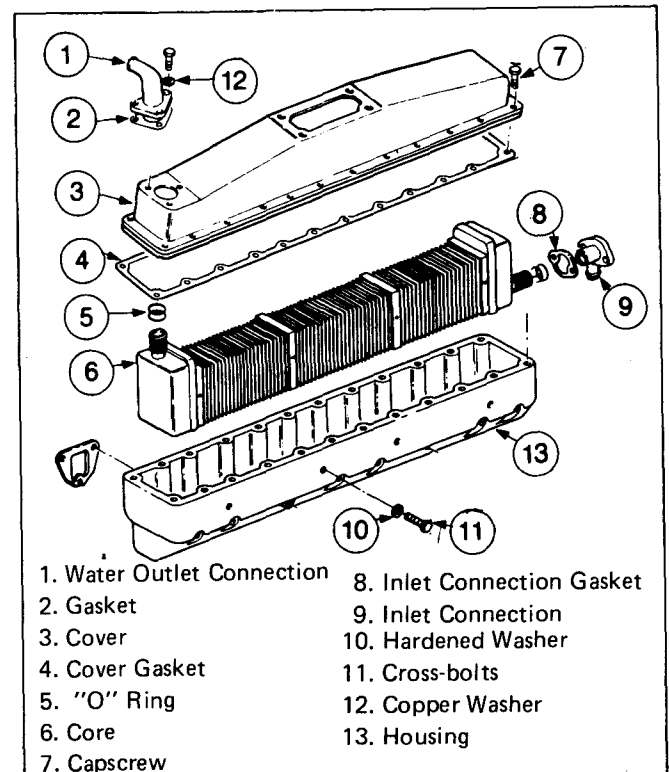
, (N10899). Aftercooler — exploded view (new)
